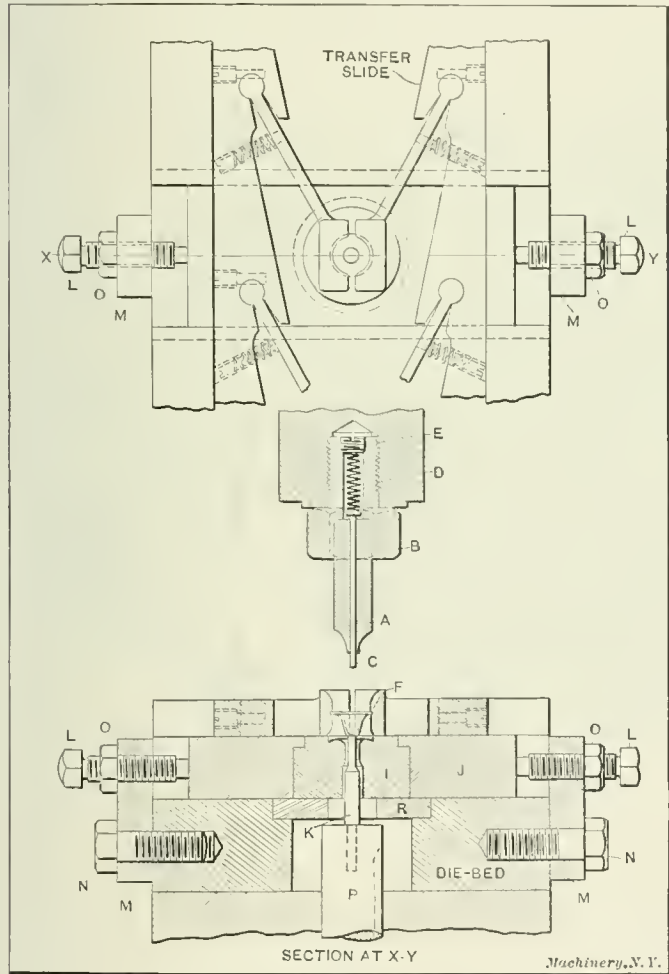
Illustration showing the Construction of the Punches and Dies used and the Manner in which they are held
